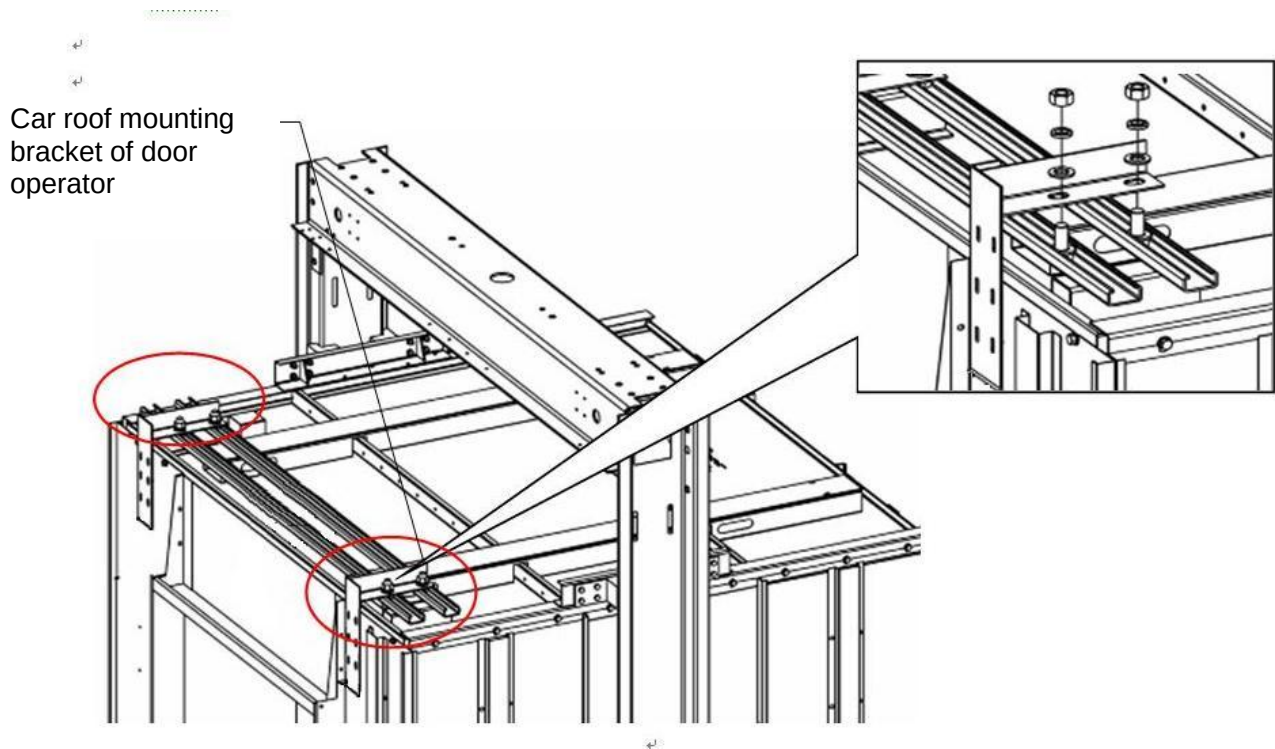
Installation of mounting bracket of door operator (installation of the car roof)
